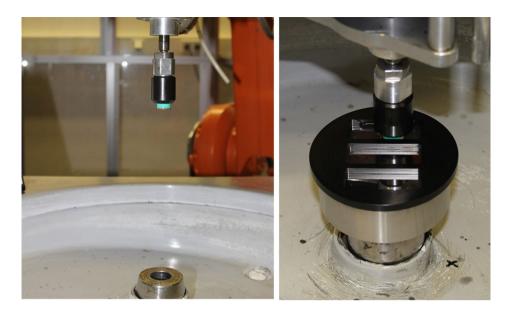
Material removal polishing attempts showing the polishing tool and the workpiece.
